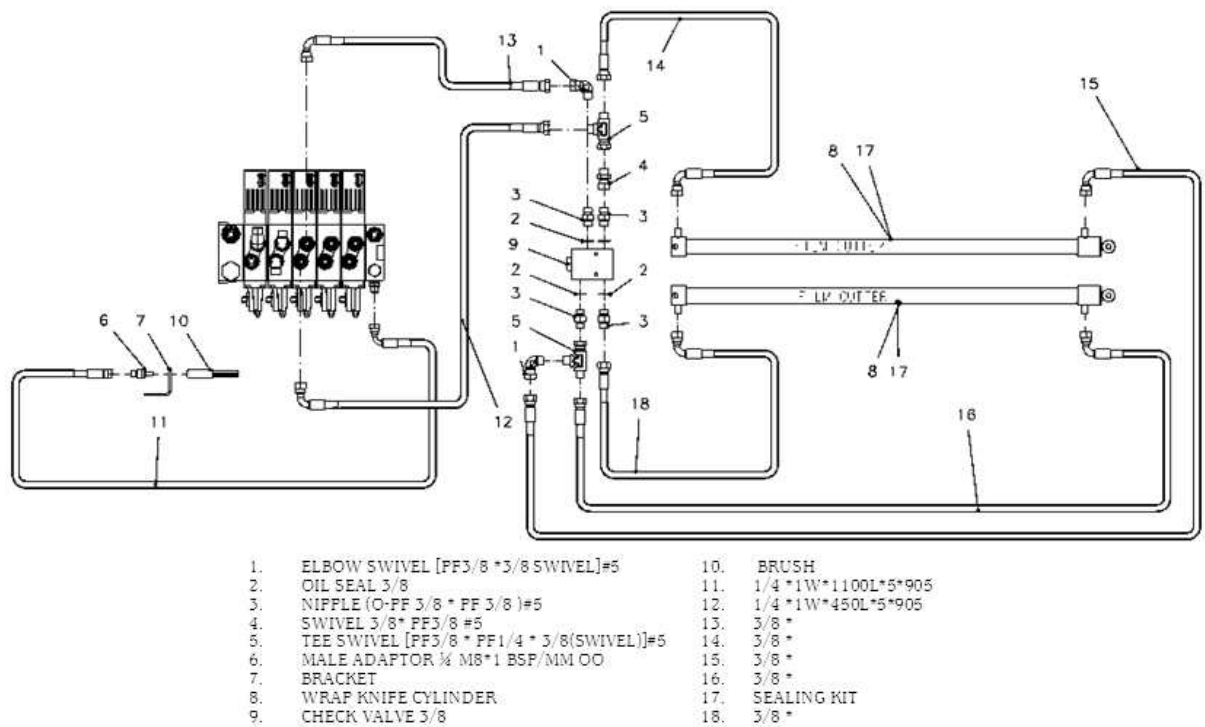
Hydraulics piping of film cutter 1 and film cutter 2
